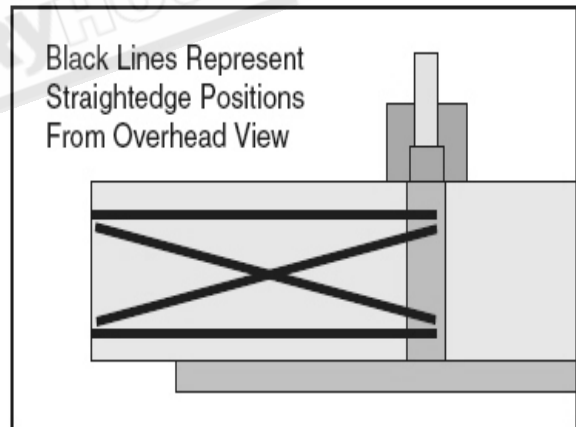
Straightedge positions for verifying if outfeed table is parallel with cutterhead.
